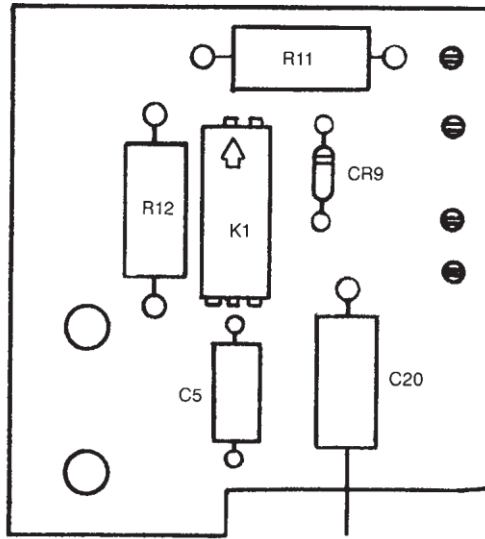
RELAY PRINTED CIRCUIT BOARD 828212
